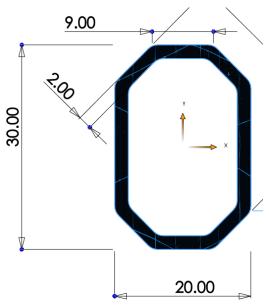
Cross-section of the carbon fiber tube stock used as rotor arms
